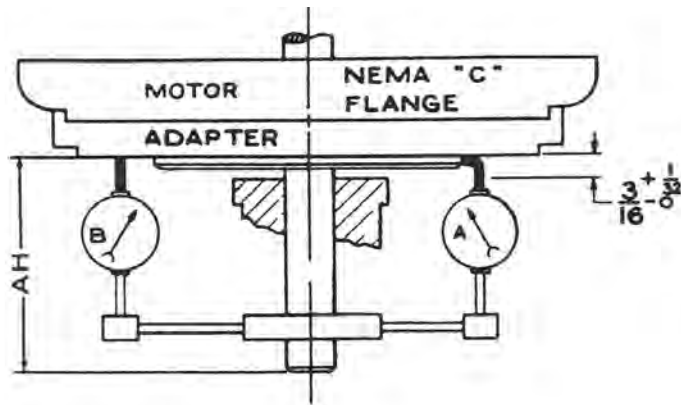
60 Series Hazardous Location Brake - Adapter Installation
